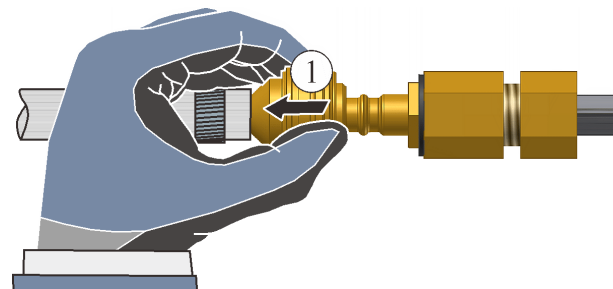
Disconnect the coupling socket from the quick coupling (similar to picture)
